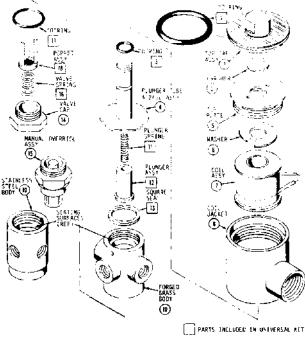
Exploded View of Typical S333 Explosion Proof Model
